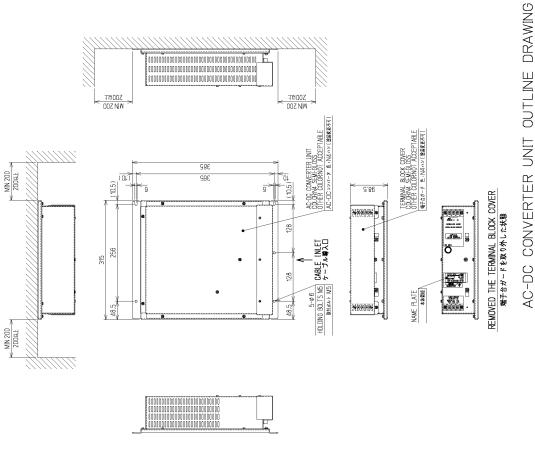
Outline Drawing of AC/DC Converter, Type NBA-5135 (Desktop type option)
